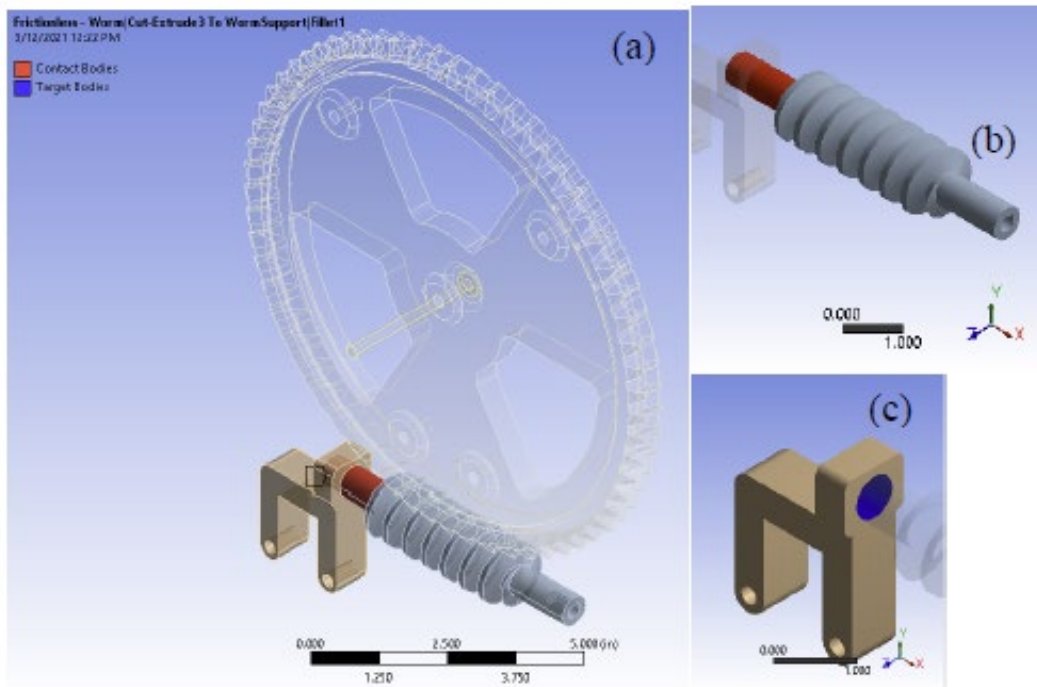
Worm gear simulation: (a) frictionless contact type between the shaft support and the worm shaft, (b) worm shaft contact body view, and (c) shaft support contact body view.
